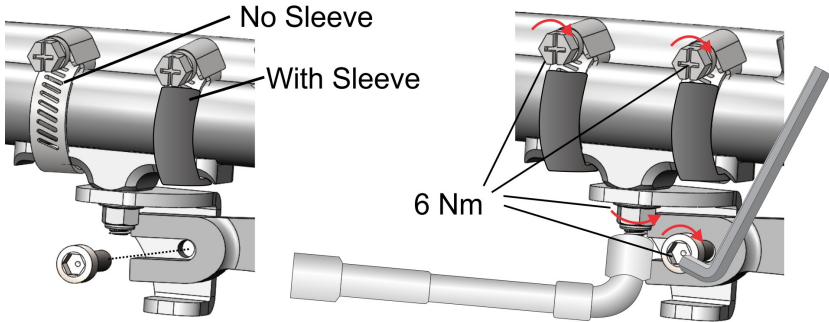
Frame Clamp installed to chainstay. Once aligned, all fasteners should be tightened to 6Nm. Rubber sleeve can be cut to size and slipped over hose clamps.
